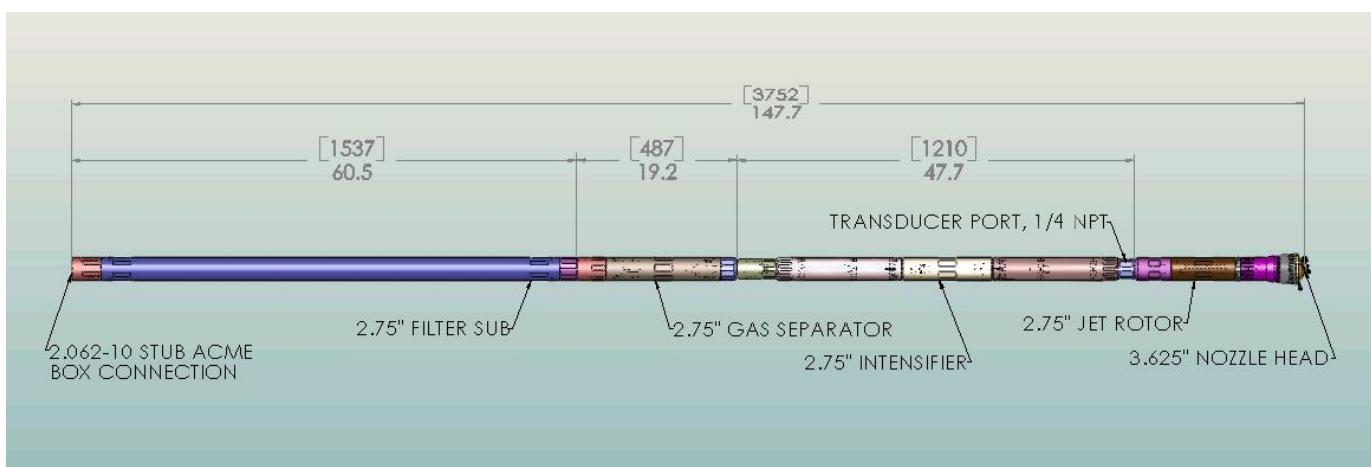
External view of 2.75" bottomhole assembly for jet drilling 3.625" hole.
